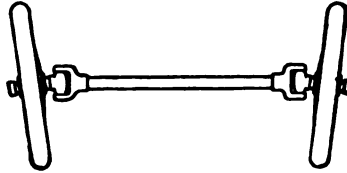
DISHED WHEELS TO SECURE LEVERAGE IN STEERING.
